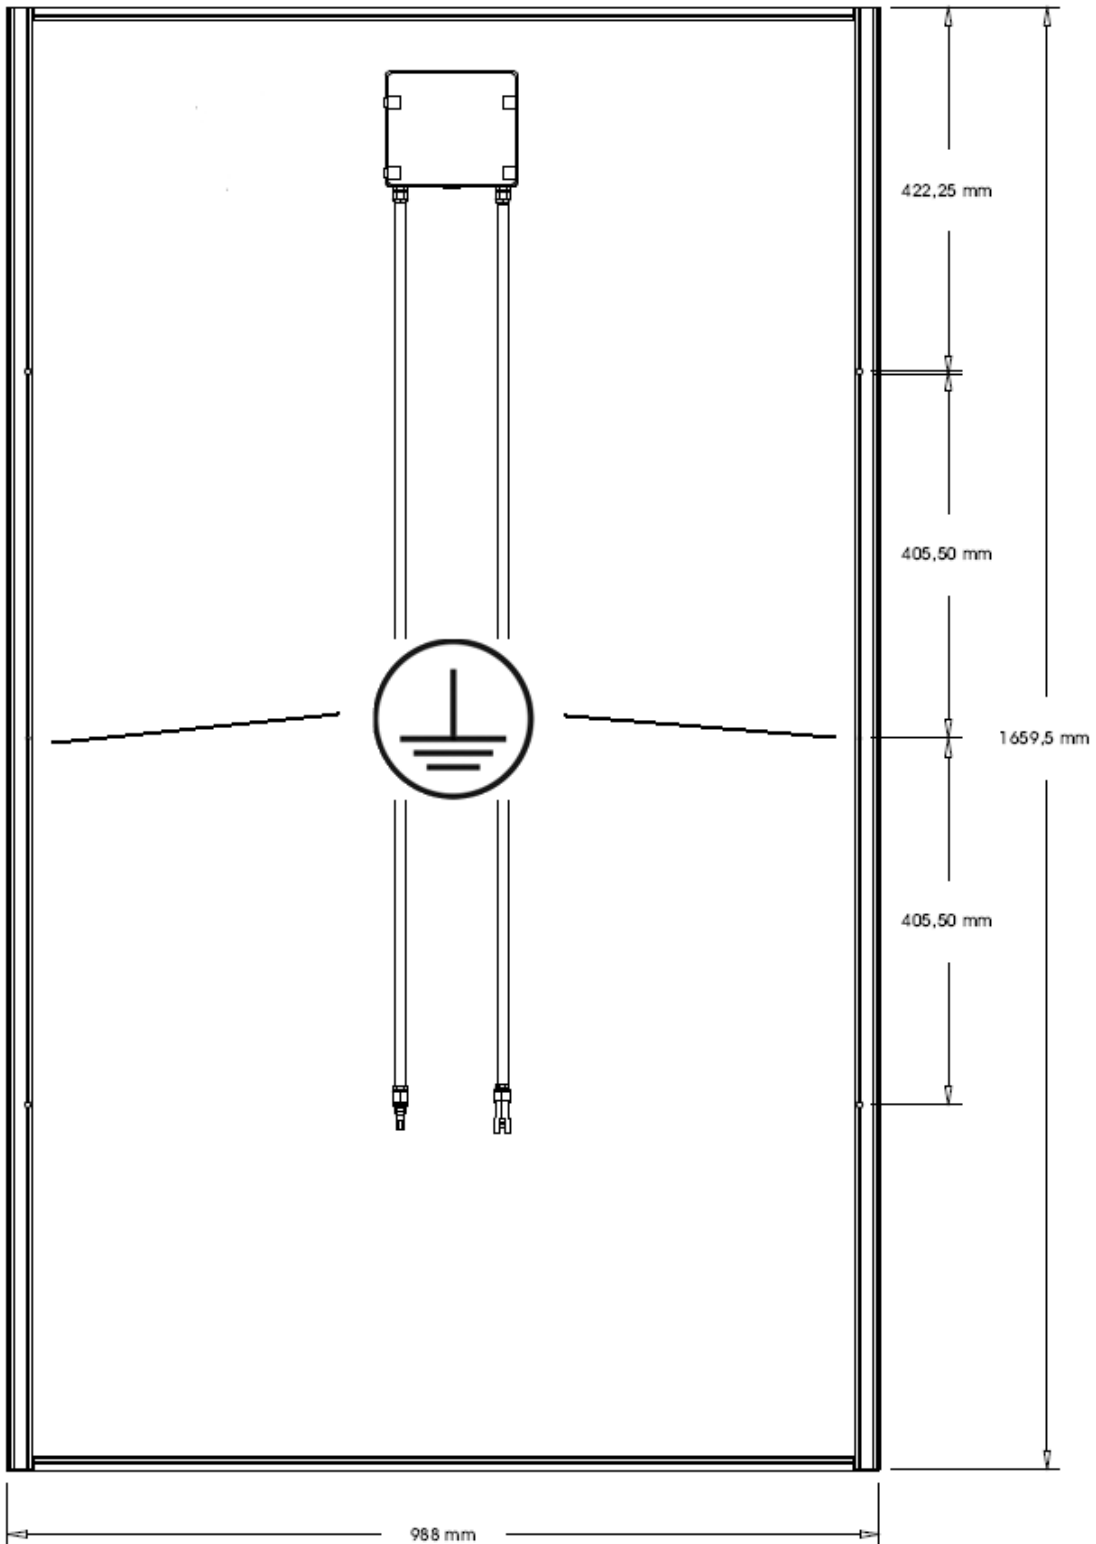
Manufacturer 11 c- Si M60 and c- Si P60
